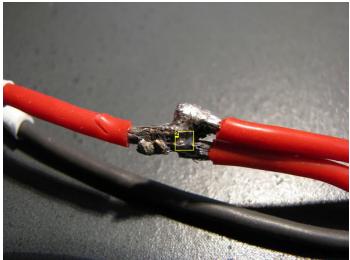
Cold solder joint. Wire wasn't heated enough.2. Cold solder joint. Wire wasn't heated enough.
